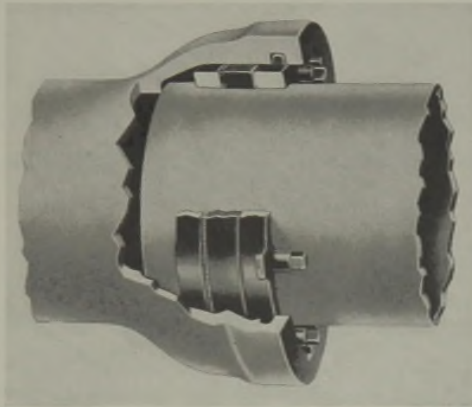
Cutaway view of Dresser Bellmaster Joint, Style 85.
